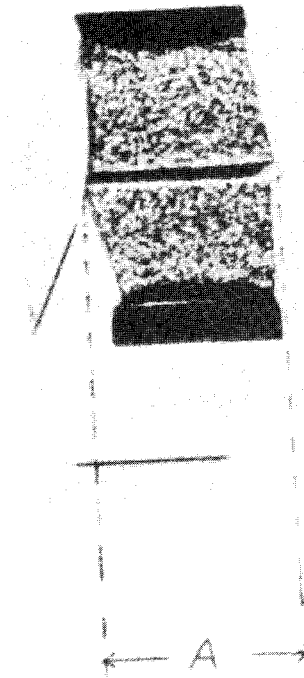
HALVES OF BROKEN CHARPY V-NOTCH IMPACT SPECIMEN JOINED FOR THE MEASUREMENT OF LATERAL EXPANSION, DIMENSION A
